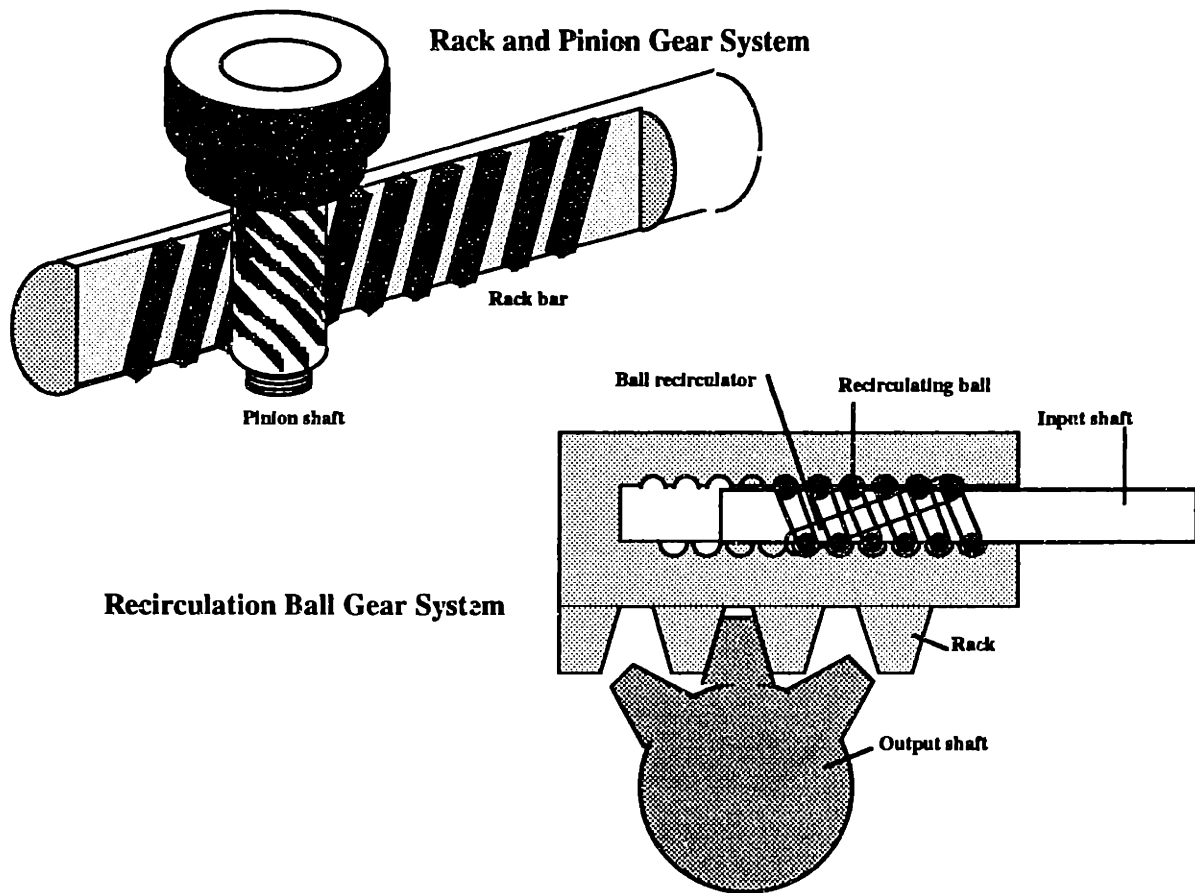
Gears: (a) A rack and pinion gear, (b) A recirculating ball system
